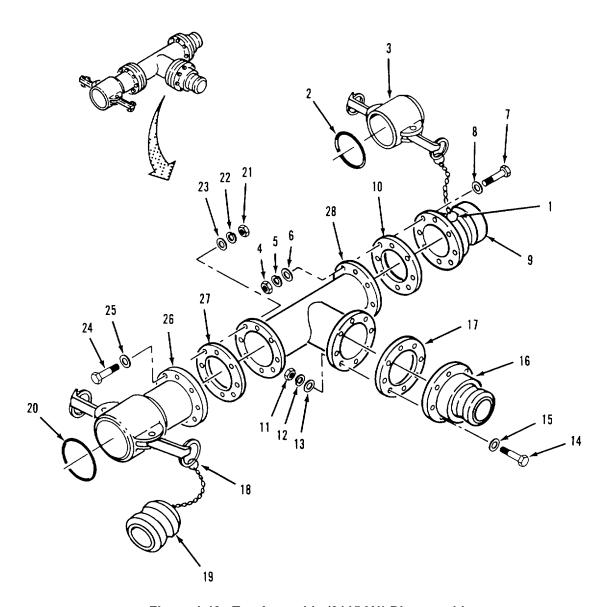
Tee Assembly (9115-Y1) Disassembly.
